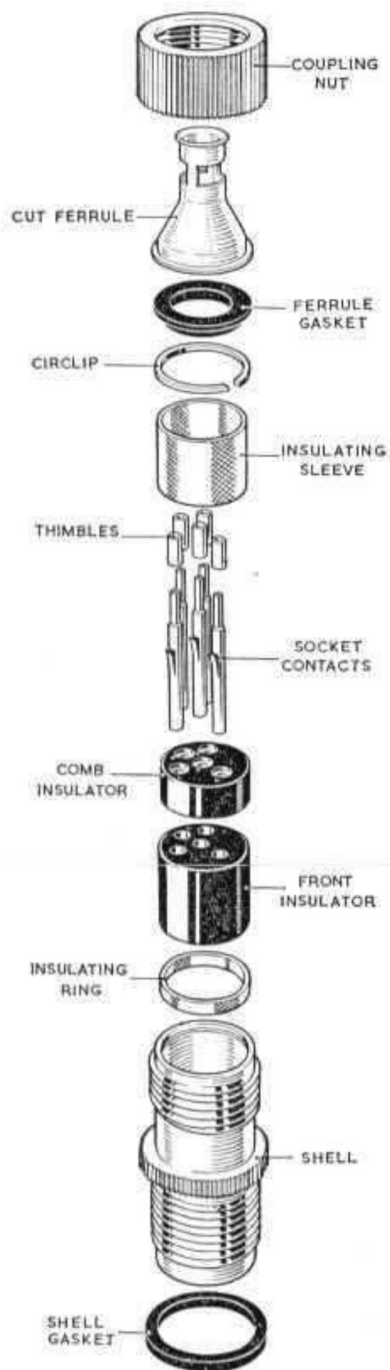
Free unit (exploded) with coupling nut and cut ferrule, climatic-proof
